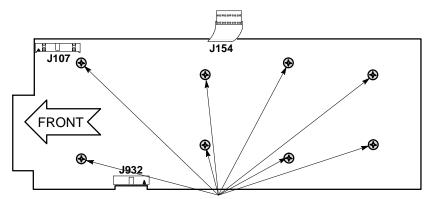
Screws that hold the Front Panel circuit board (A2) in place.
